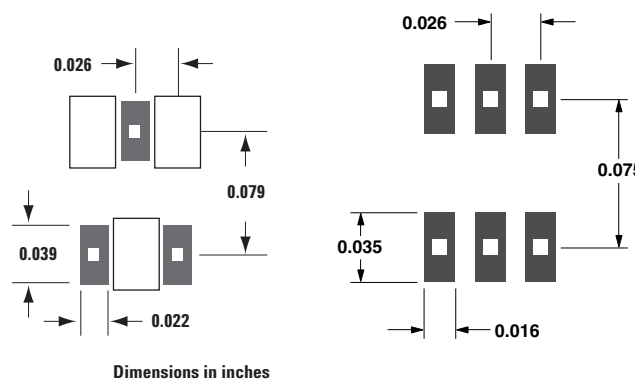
Recommended PCB Pad Layout for Avago's SC70 3L/SOT-323 Products.
